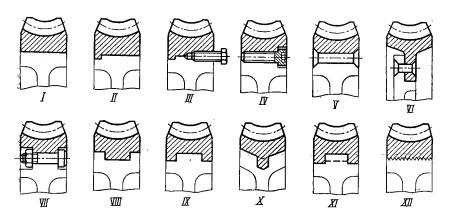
Assembling bronze gear rims to cast iron or steel discs
